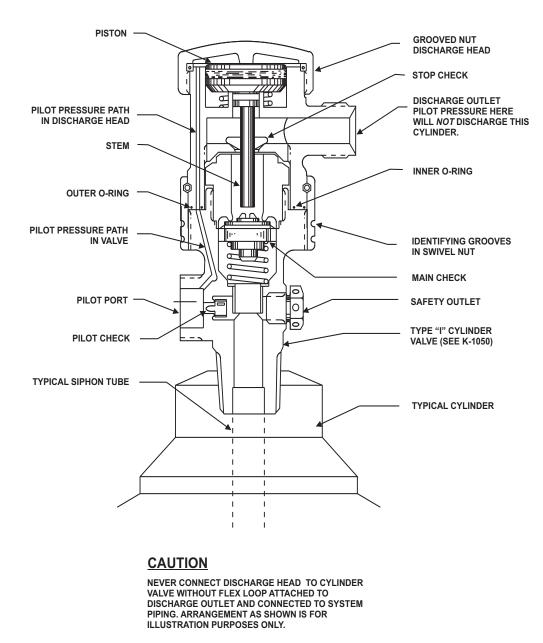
Installation of Grooved Nut Discharge Head to Cylinder Valve
